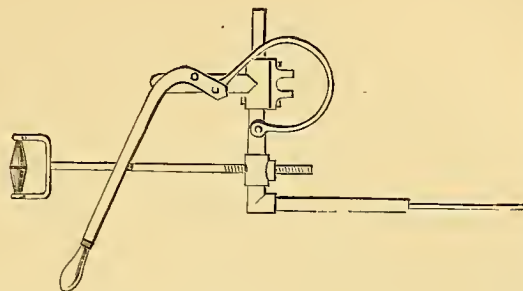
LEFT HAND SPADE HANDLE. Scale, 1 1/4 in. to foot.
